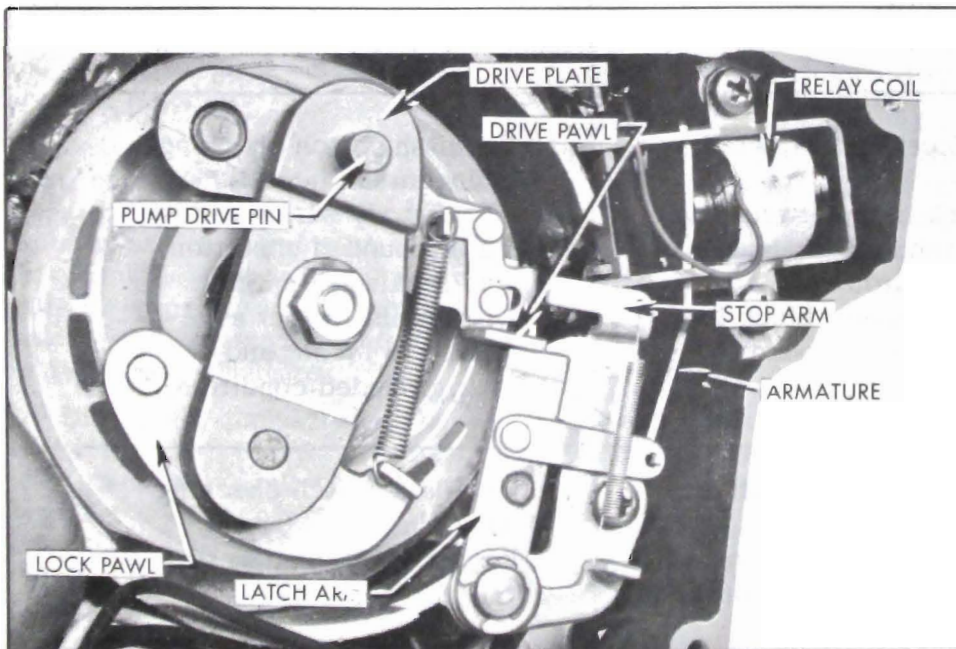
Drive Plate Stopped—Motor Running—Typical View
